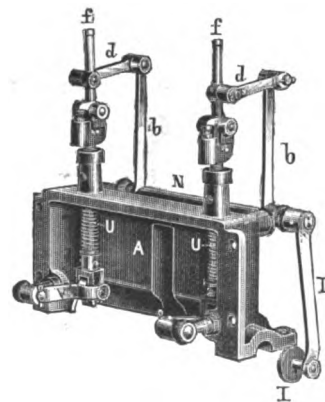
DETAILS OF EXHAUST VALVE GEAR OF ROCHET MOTOR.
